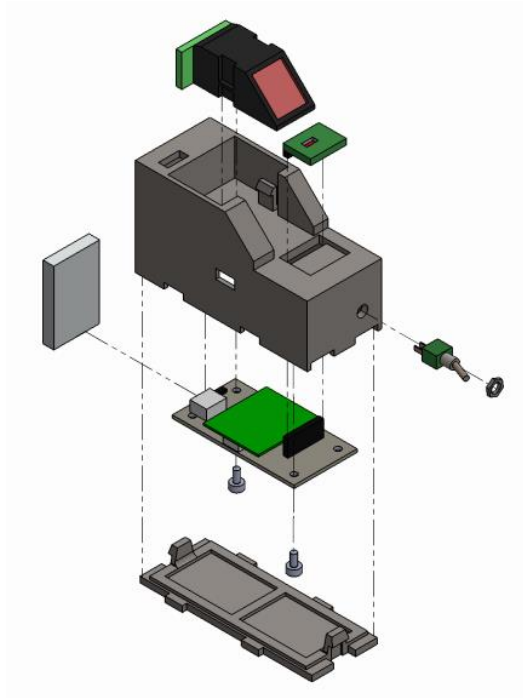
Exploded View of the Pulse Oximeter Design That Was Created in SolidWorks
